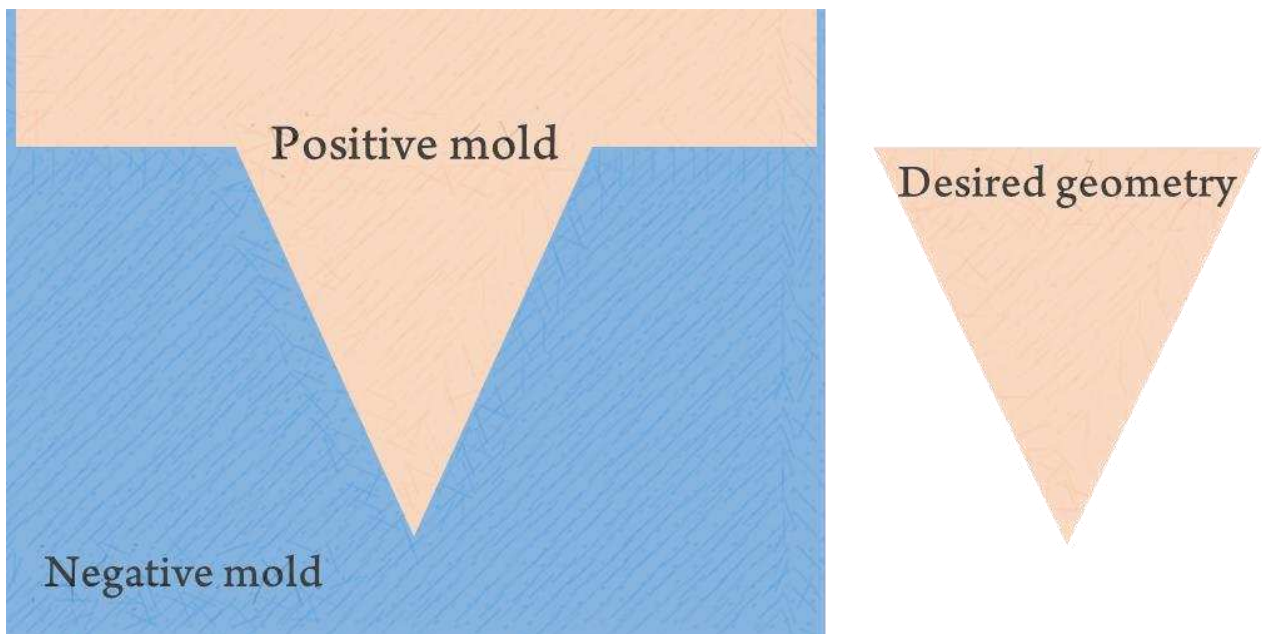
4. Schematic representation of negative mold (master mold), positive mold, and desired geometry.
